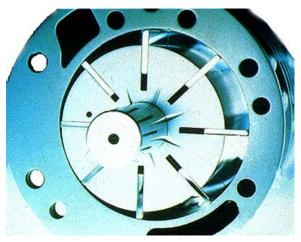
End view of rotary vane compressor housing and rotor (Source: VMAC)
